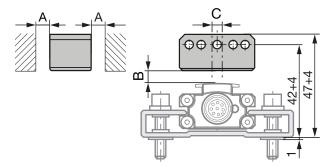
Dimensions and distances with BTL6-A-3801-2 magnet
